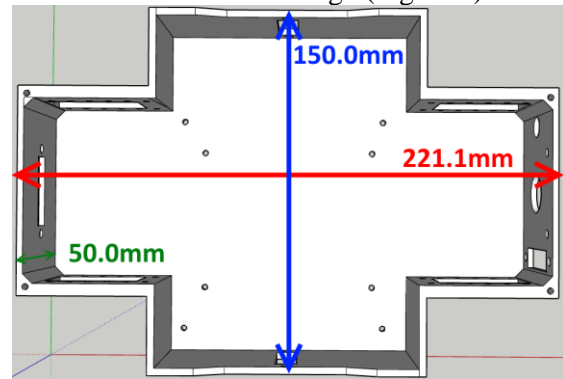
(Top View) The dimensions of the final Robot chassis.
